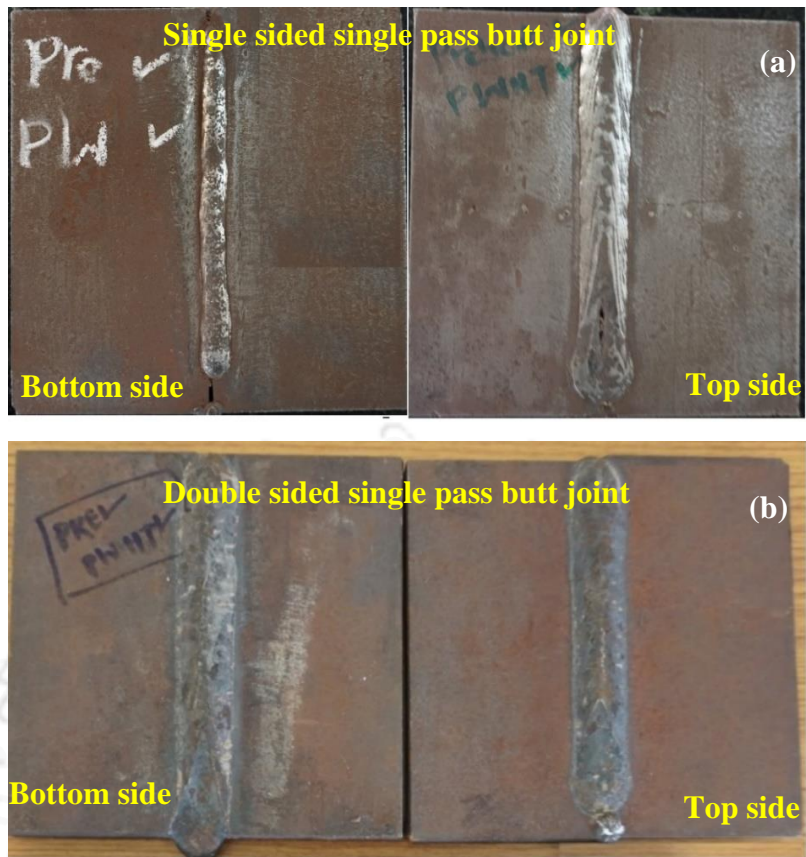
Square butt (a) single-side single pass weld joint (b) double-side single pass weld joint
